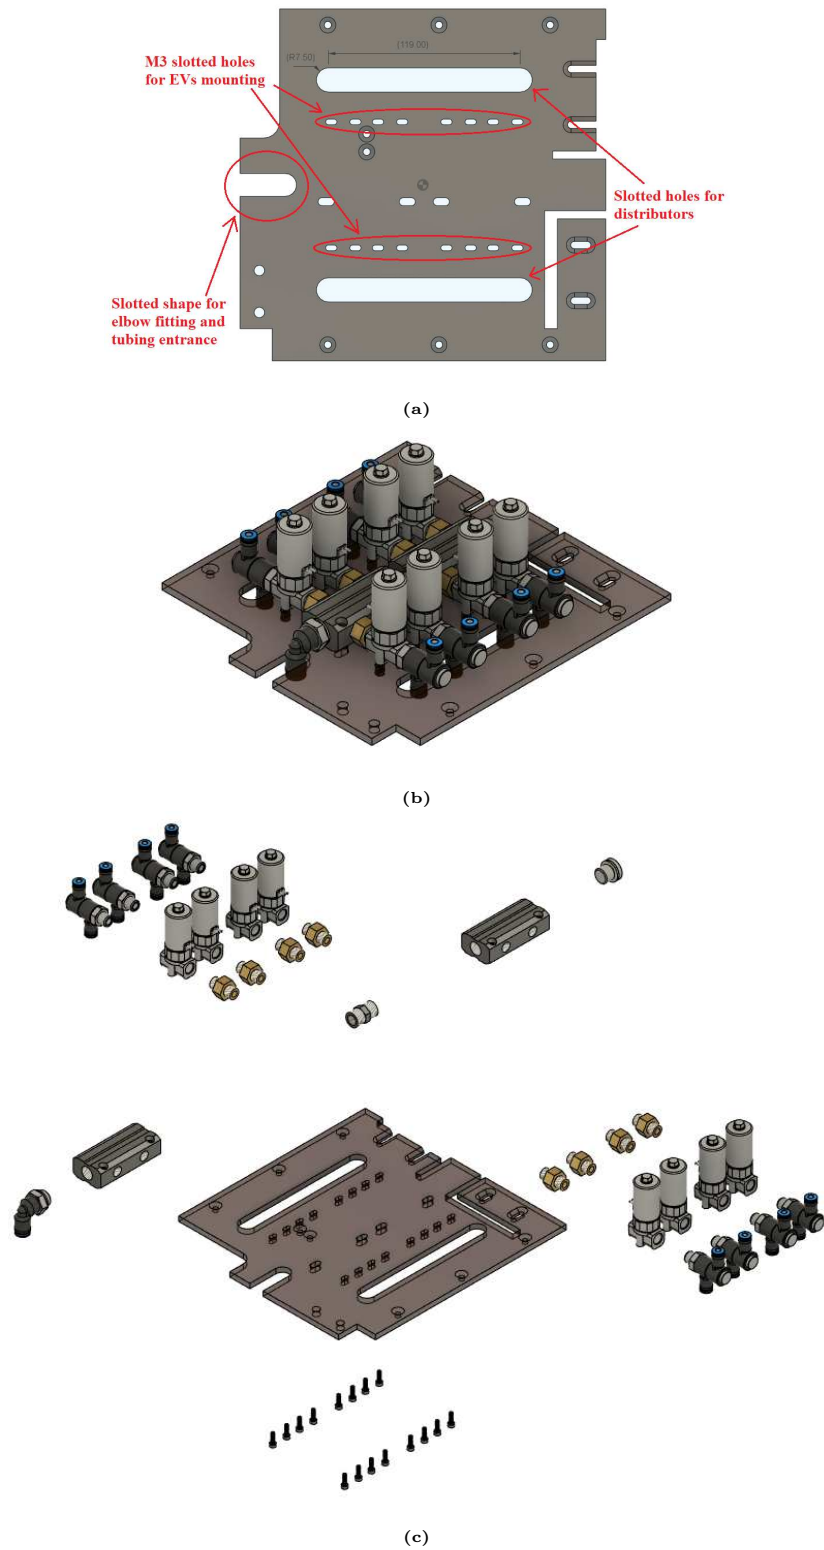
(a) Slotted holes for the EVs on the mid wall, (b) mounted nozzle EVs assembly and (c) exploded view.
